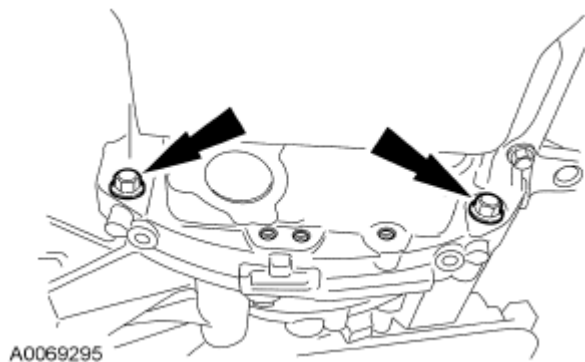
Locating Transaxle-To-Engine Bolts (1 Of 2)
